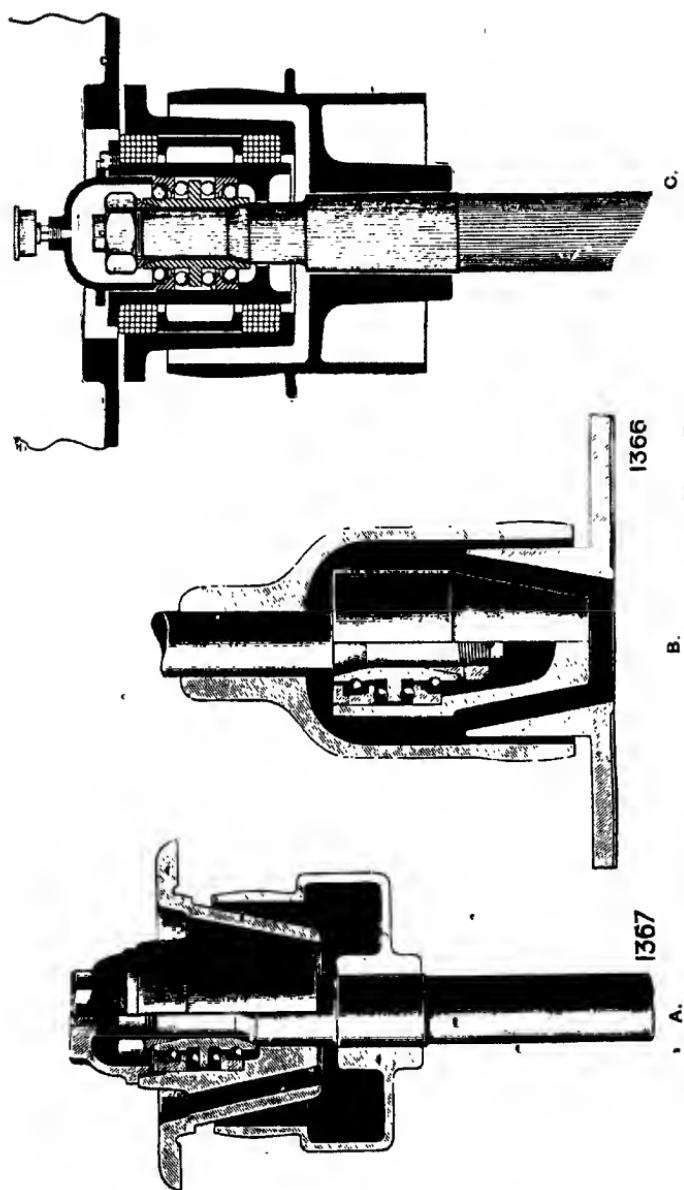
Types of Ball Bearings for Hydro-Extractors.
